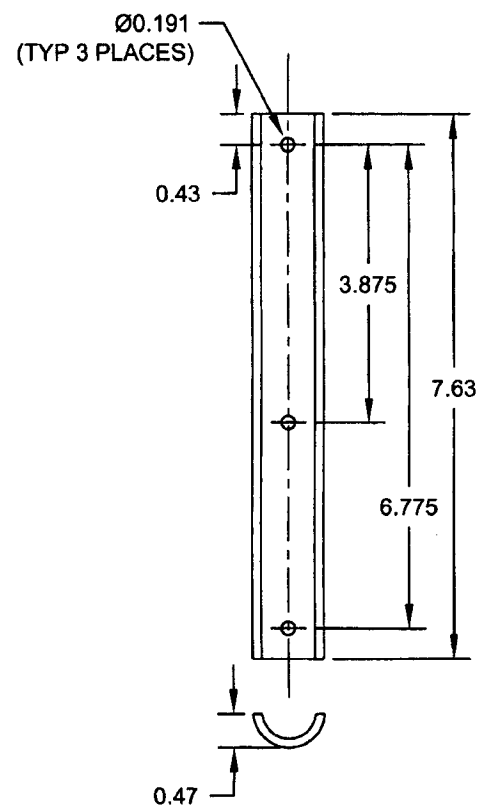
SADDLE (SHEET 3): Ø0.257 TYP 3 PL WAS Ø0.191 (TYP 3 PLACES) AS SHOWN:
